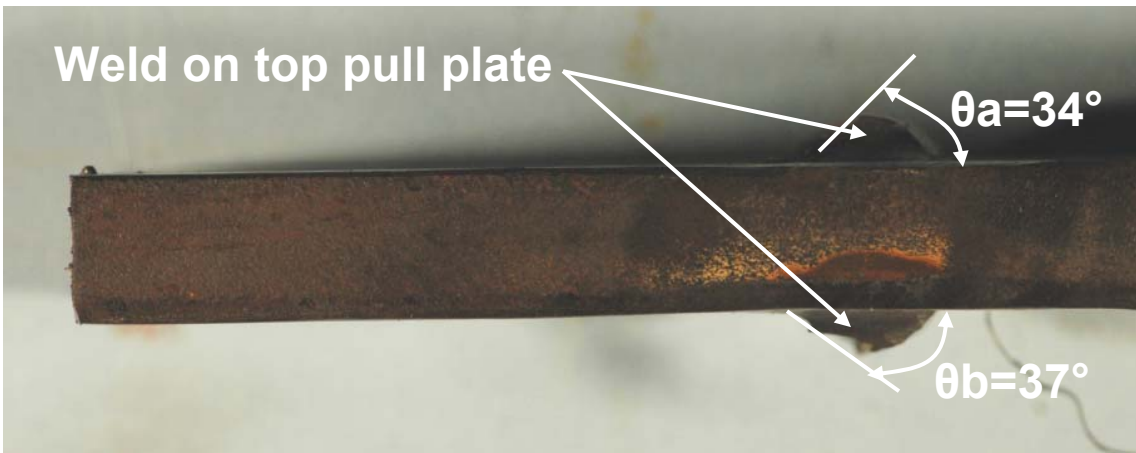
Photograph of a side view Specimen 6, where the profile of the fractured weld on the top pull plate is visible
